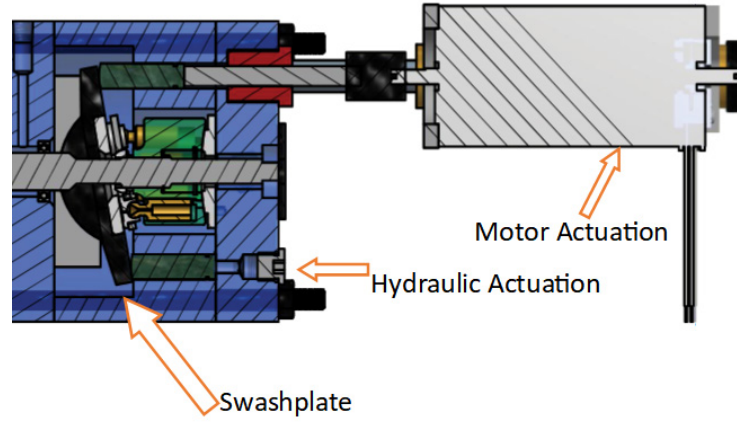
CAD drawing illustrating the stepper motor and hydraulic piston utilized for the automatic control of the swashplate
